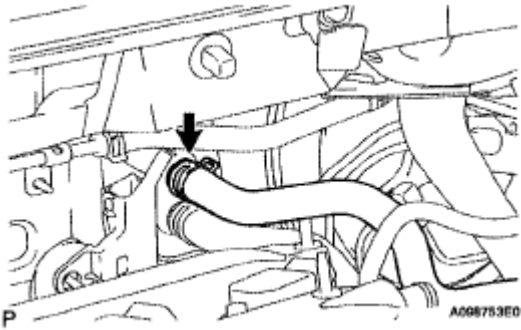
Locating Heater Water Inlet Hose From Booster Vacuum Tube
